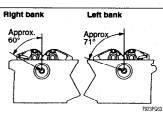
Proper positioning of the camshafts—3.0L SOHC engine
